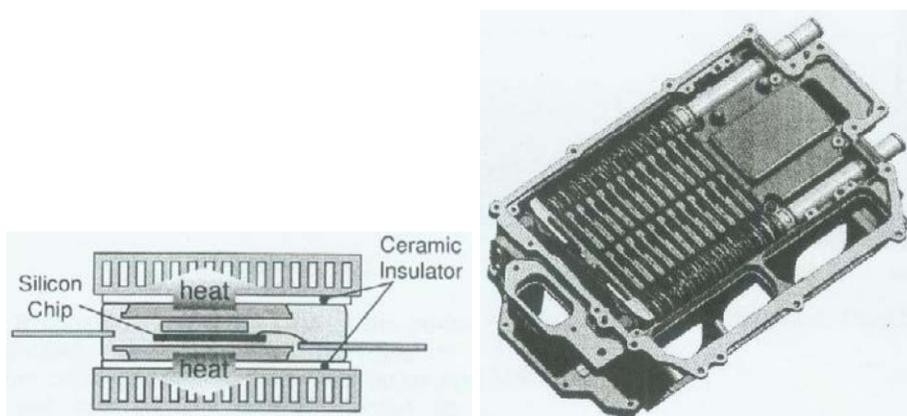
Lexus LSG00h Double-Sided Cooling Design and View of IPM Assembly.
